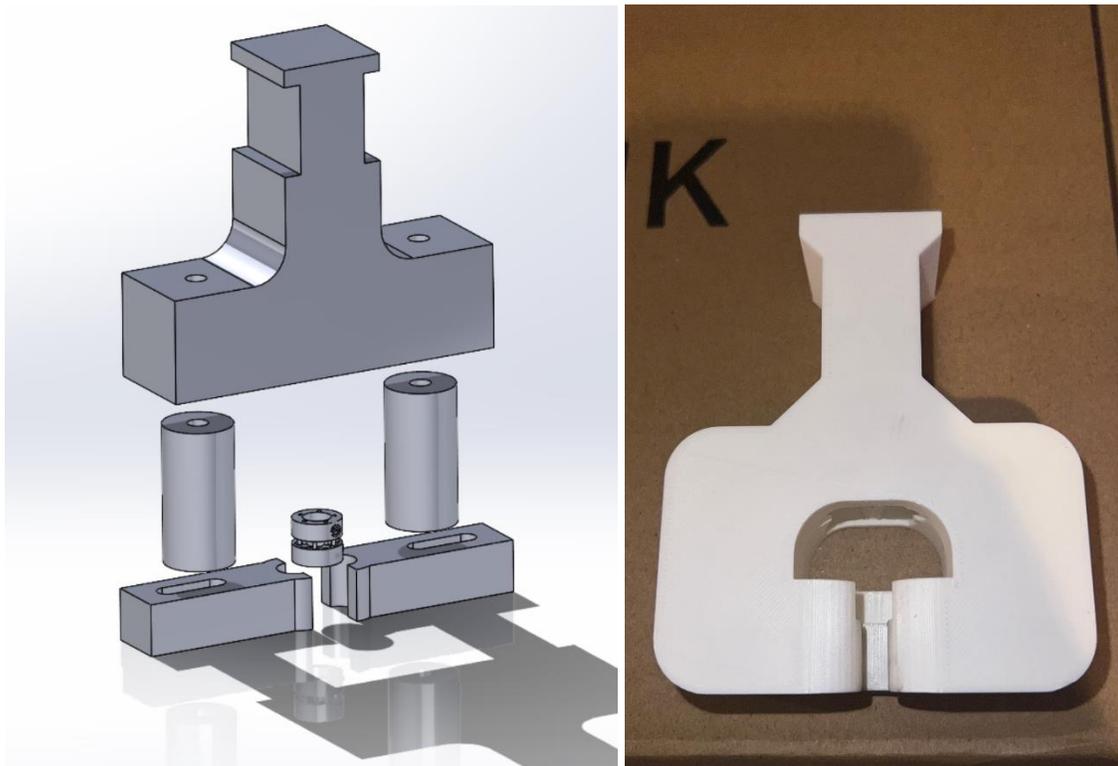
Vessel Grip Test Fixture: Solid works first sketch (left), Fixture used in Testing (right)
